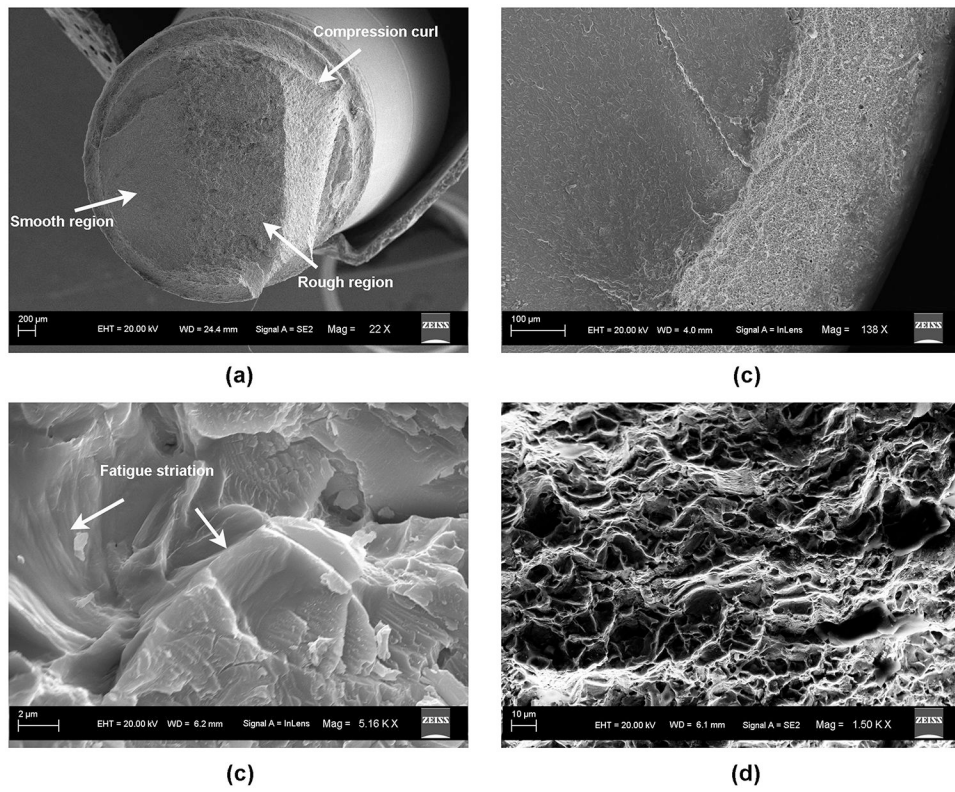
SEM images of fractured surface. (a) Gross view of the fracture surface; (b) area of fracture origin; (c) fatigue striations; (d) ductile dimples.
